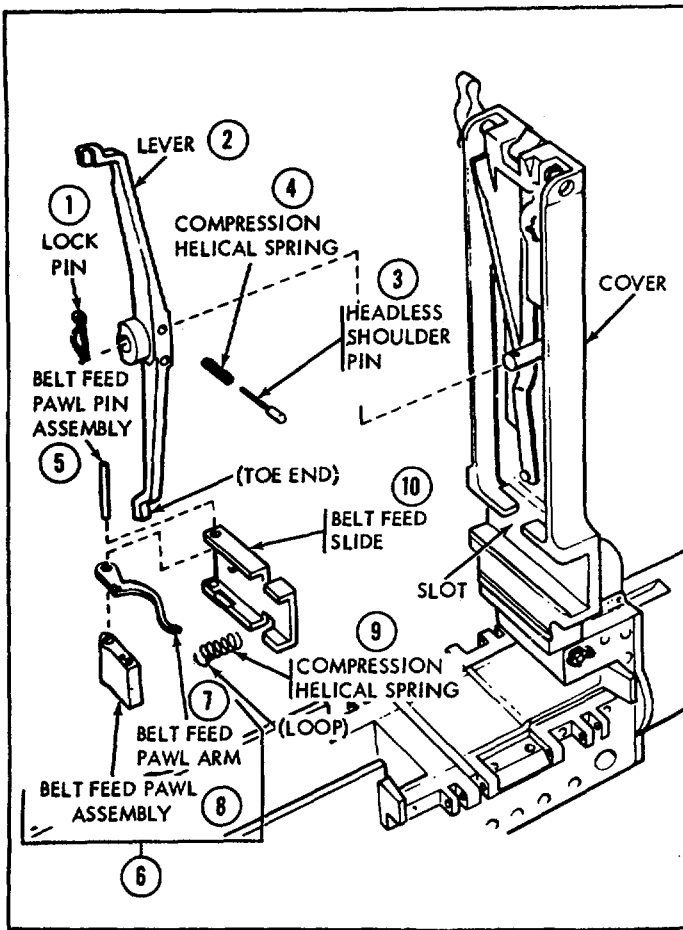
Disassembly/assembly - cal. .50 machine gun, M2, HB (3 of 4)
